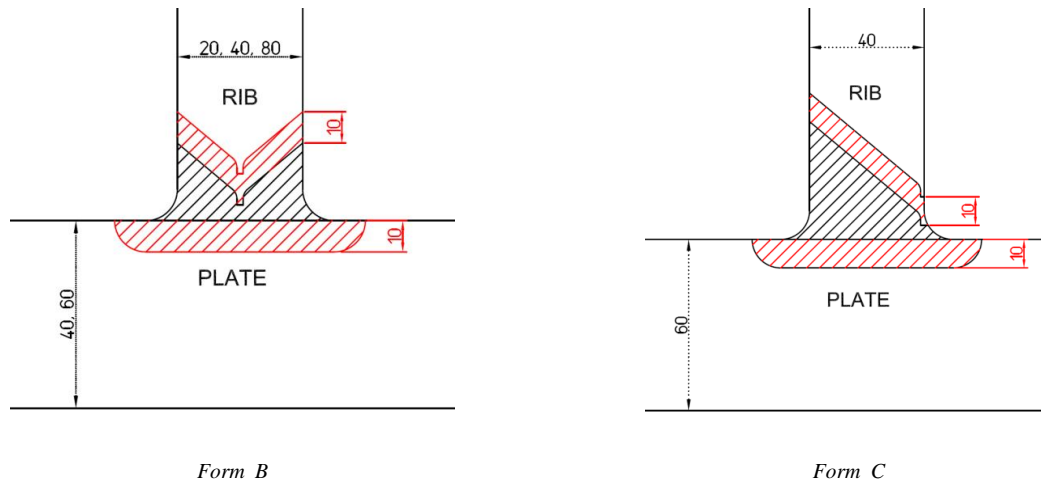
Weld forms, thicknesses and examination volumes of ITER VV T-joint welds (UT).
